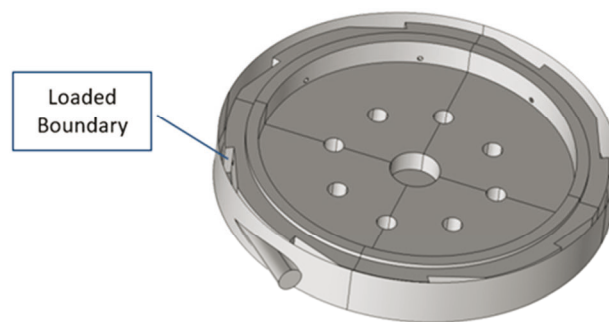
Geometry of semi-open rotating polishing disc assembly
